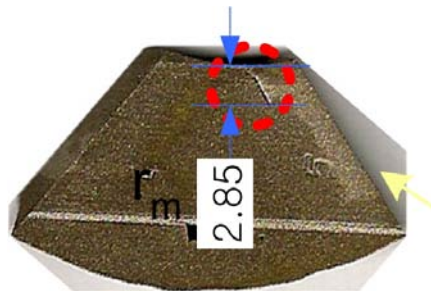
Flaw #5 Surface Crack of Pipe I.D.
